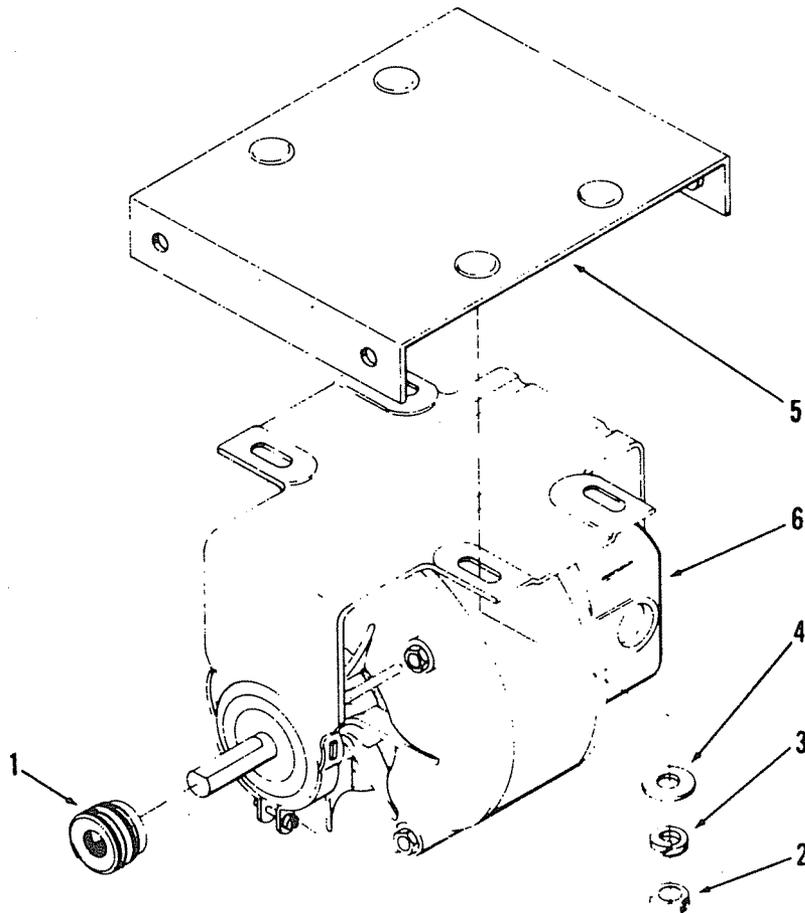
BEATER DRIVE MOTOR AND MOUNTING PLATE ASSEMBLY
